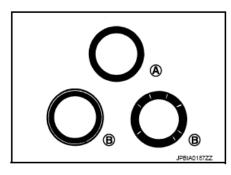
Identifying Proper And Improper Valve Seat Contact Courtesy of NISSAN NORTH AMERICA, INC.
